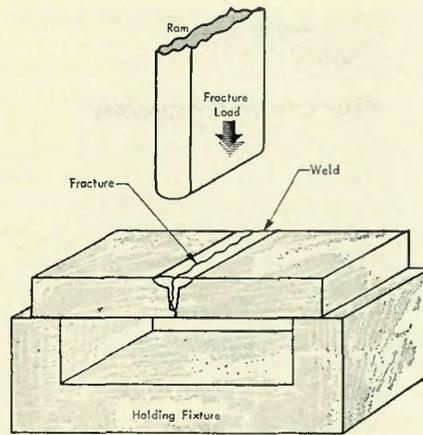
Setup for longitudinally fracturing weld specimens
